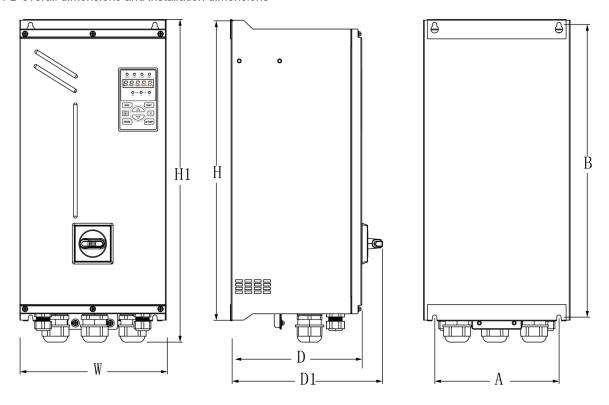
SIZE A ~ SIZE C (VFD510-2R2-T4B ~ VFD510-015-T4B) overall dimensions
